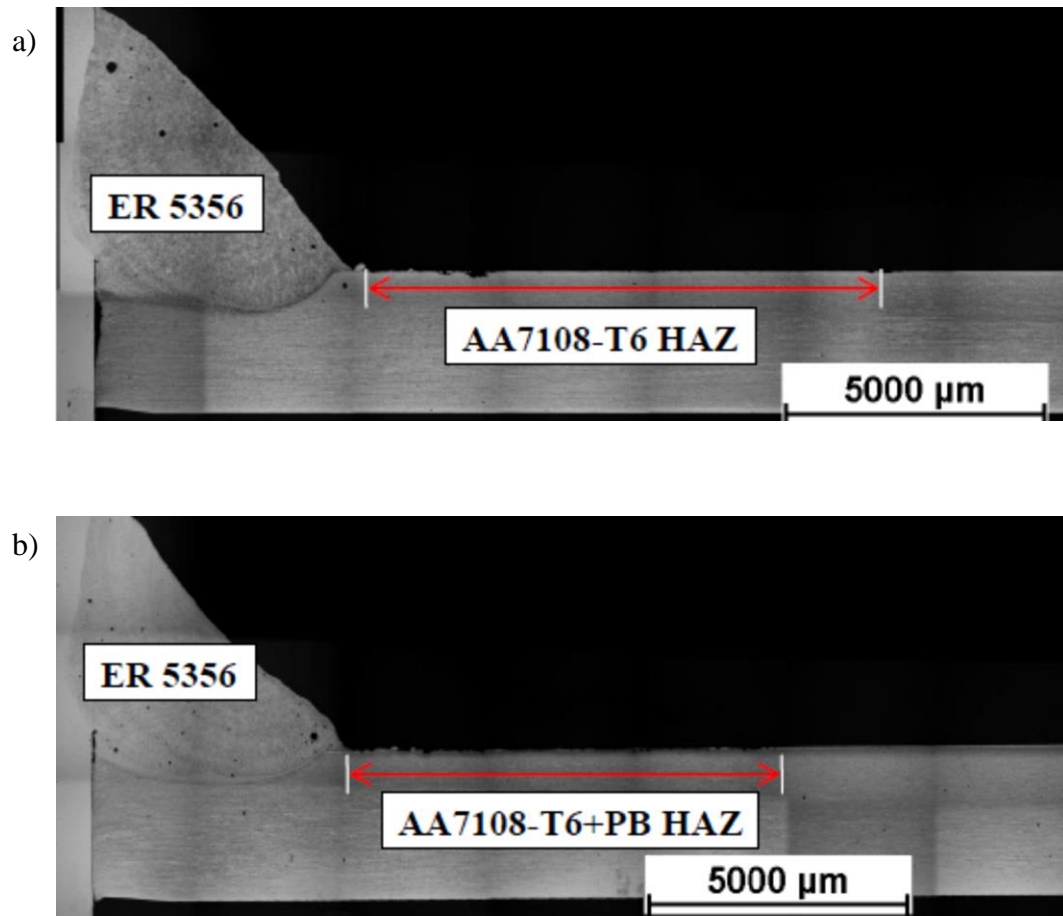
Large area scans of T-joint welded configuration F (ER5356/AA7108/L) in the (a) as-welded T6 condition and the (b) as-welded T6+PB condition post exposure to ASTM G85-A2.
